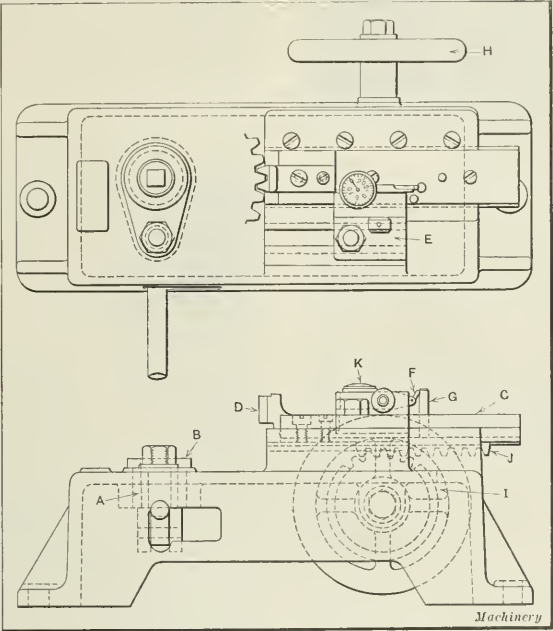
Fixture for testing Concentricity and Thickness of Teeth of Transmission Gears
